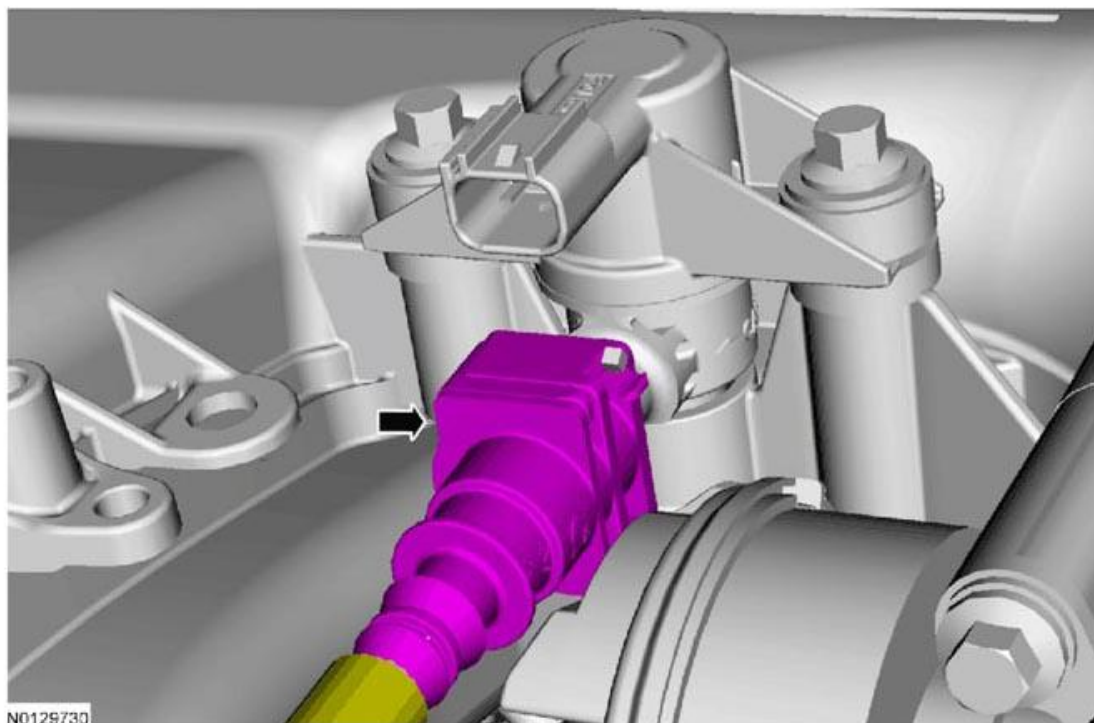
Locating Exhaust Camshaft Phaser And Sprocket Bolt
